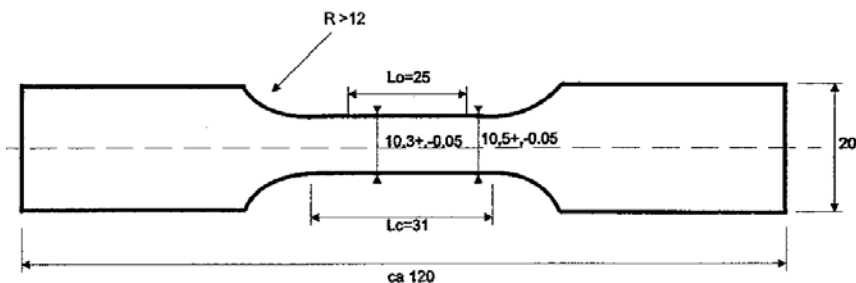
An illustration of a tensile specimen, with relevant dimensions in mm.
